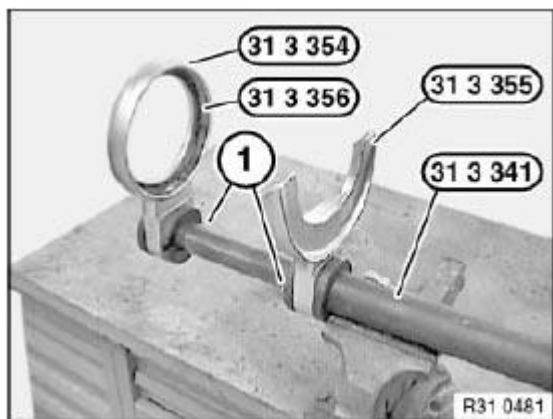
Identifying Special Tool (31 3 354), (31 3 355) And (31 3 356)
